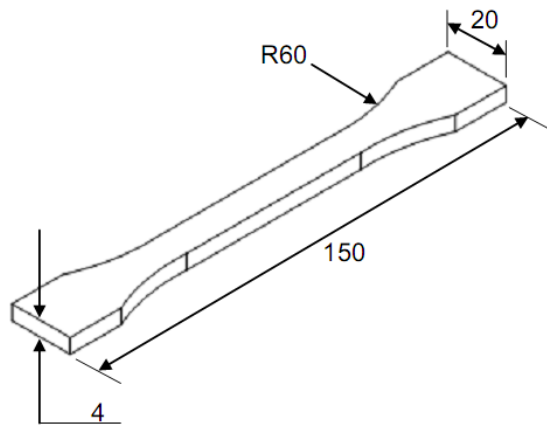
Tensile strength specimen (all dimensions are in mm)
